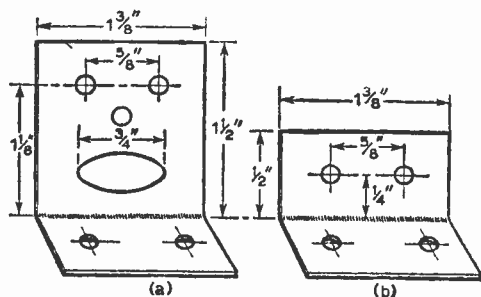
(a): A bracket for mounting large relays; (b): dimensions of a bracket for a Siemens relay.
